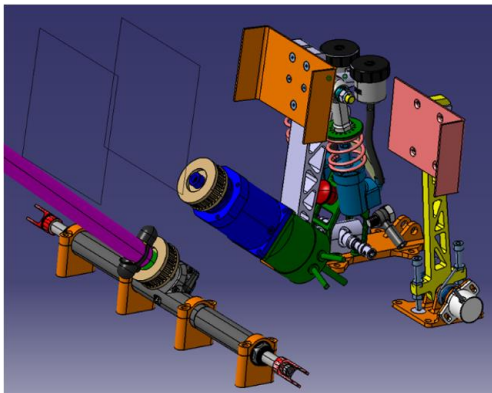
Solution 2 - BLDC motor + planetary gearbox & synchronous belt drive in SC18
